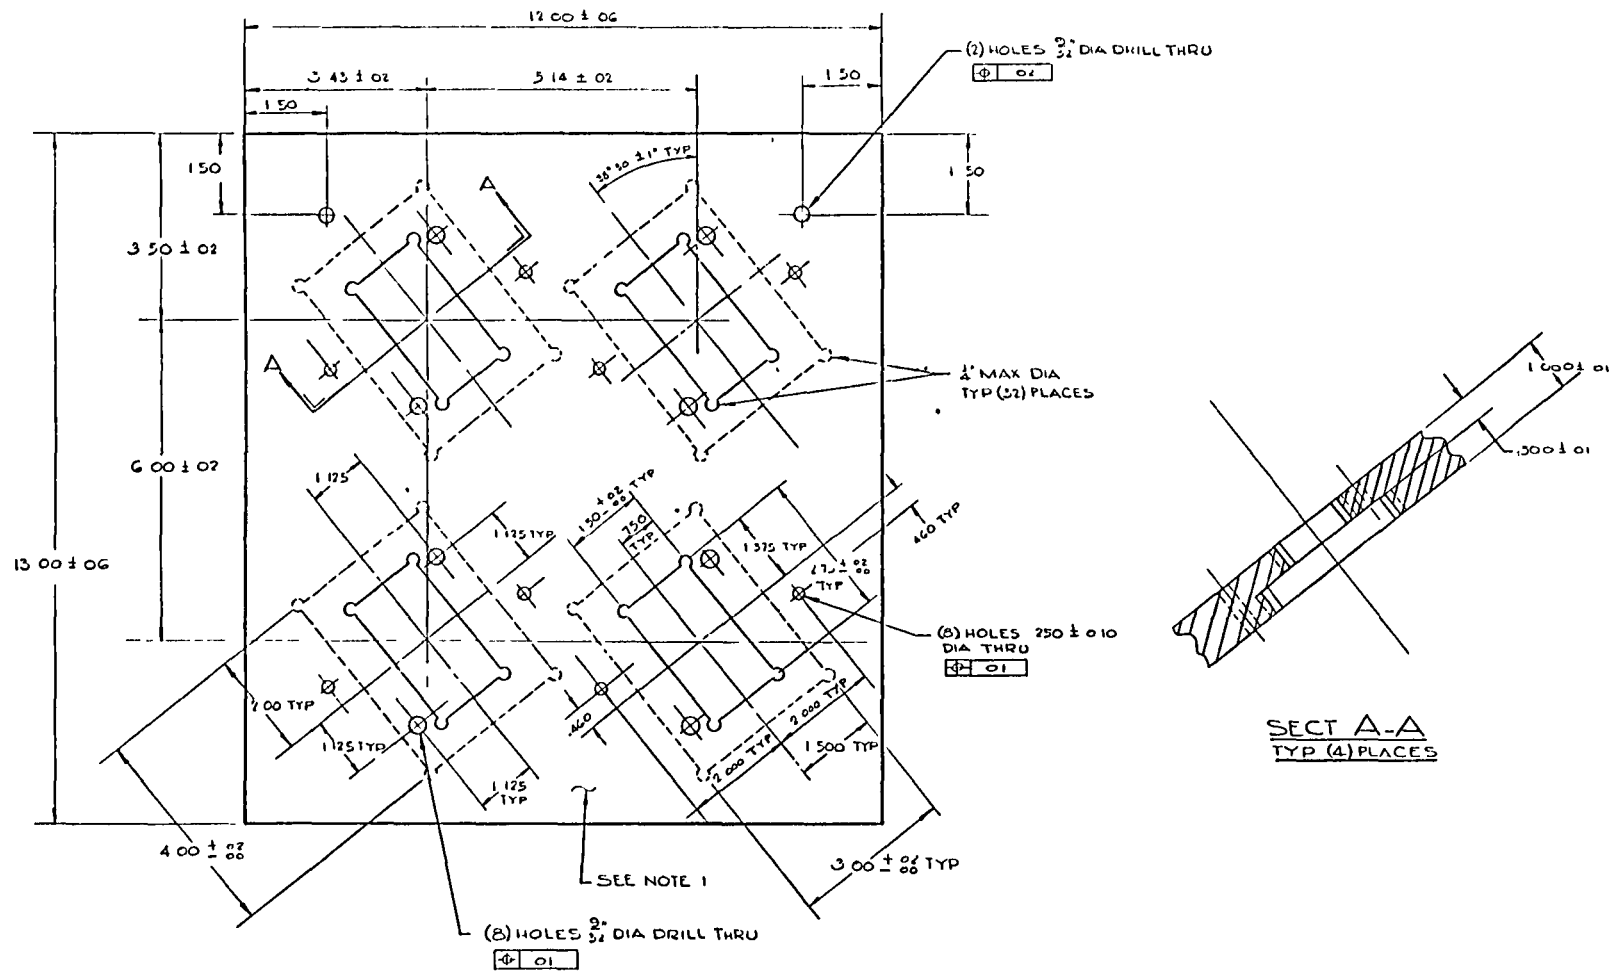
Multiblade Plating Fixture Base Plate Drawing.
